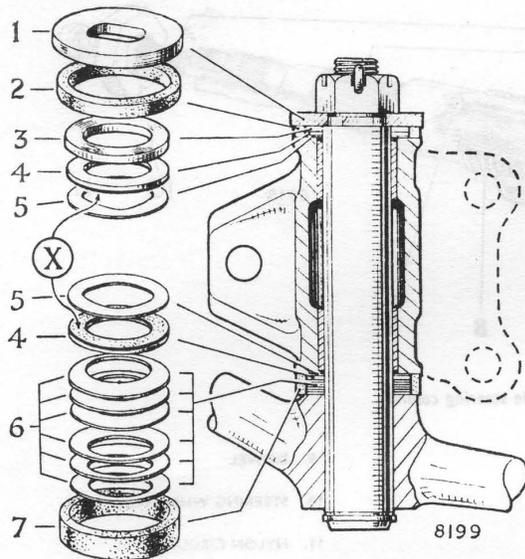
Cross section-through steering relay lever assembly and exploded view of bearing and Belleville washers.
